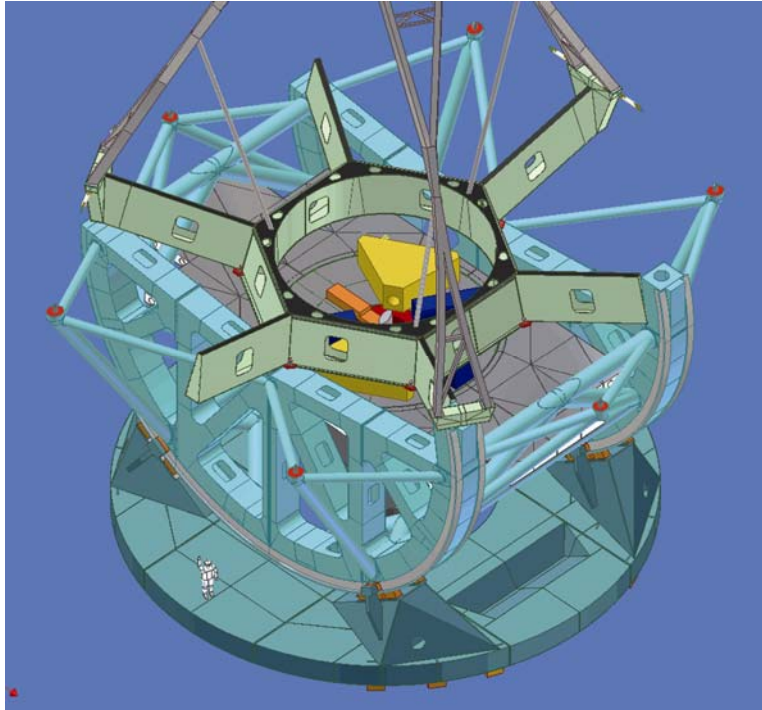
Cell Connector Frame, truss, C-ring structure.
